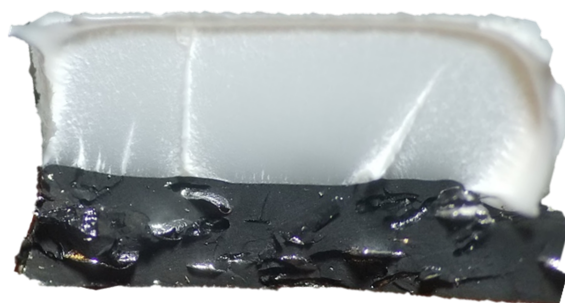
Fracture surface of a bilayer tensile specimen with doped and neat polyethylene layers.
